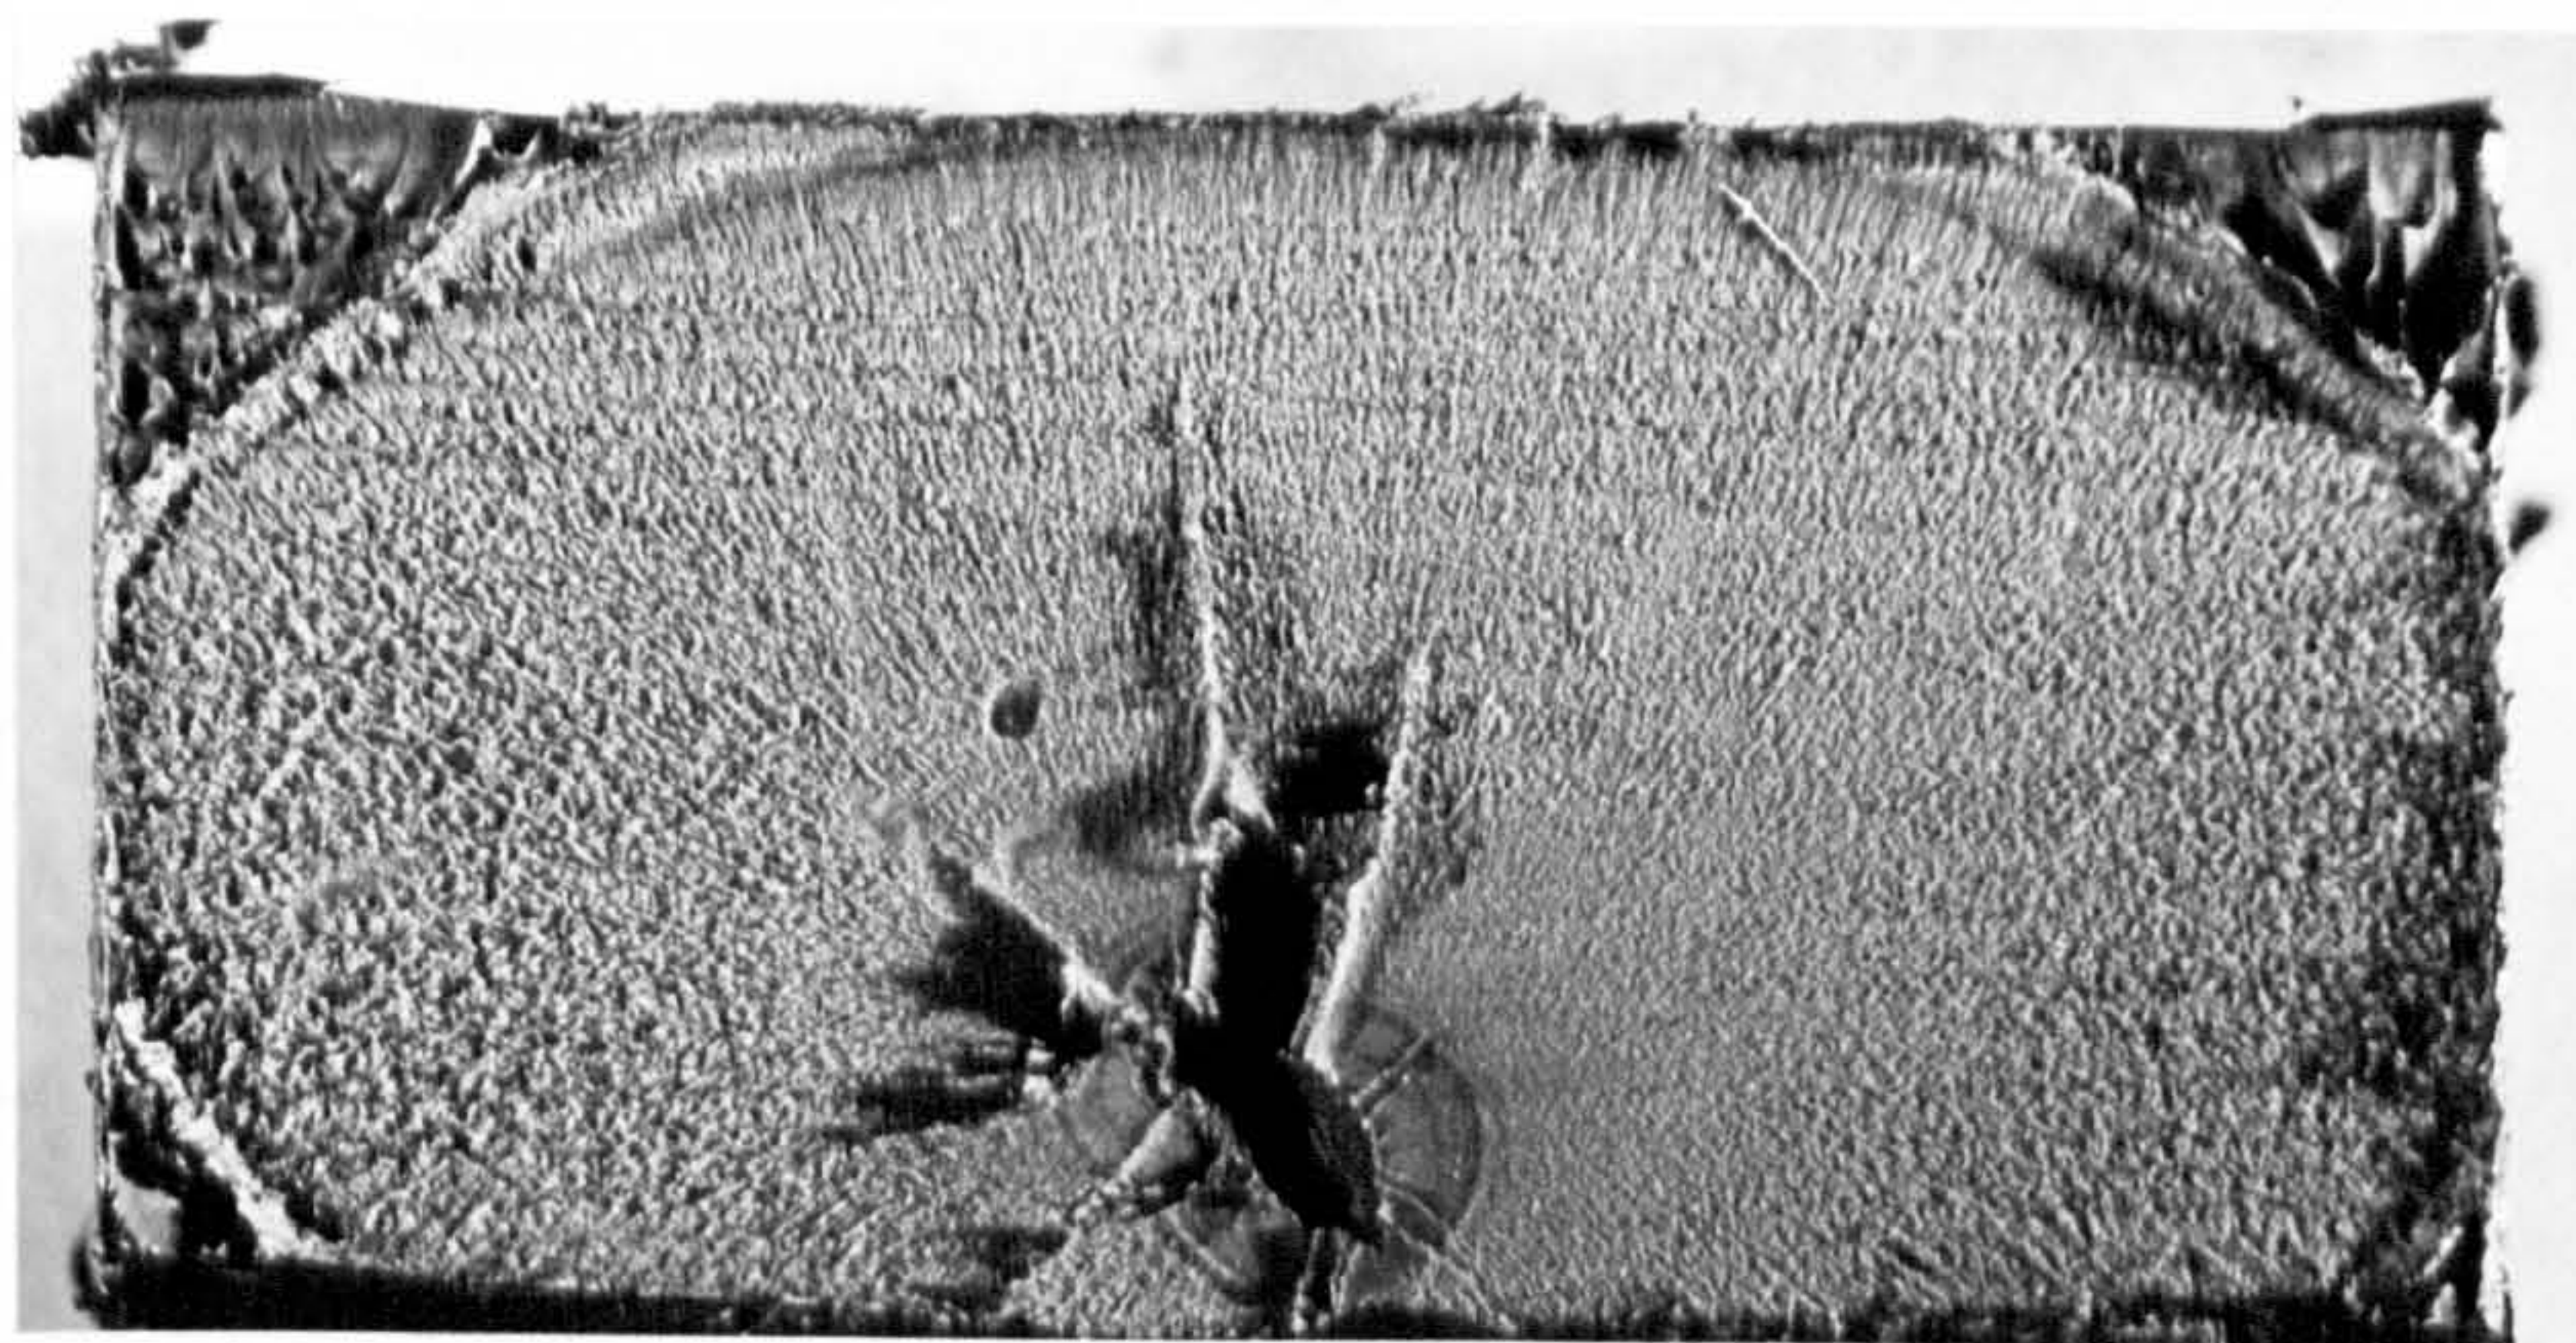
Surface of an HDPE butt-welded specimen prepared by sledge microtomy showing weld bead assymetry.
